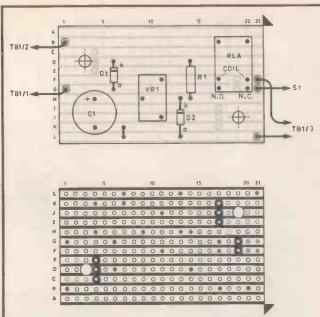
Stripboard component layout and details of breaks required in the underside copper tracks.
